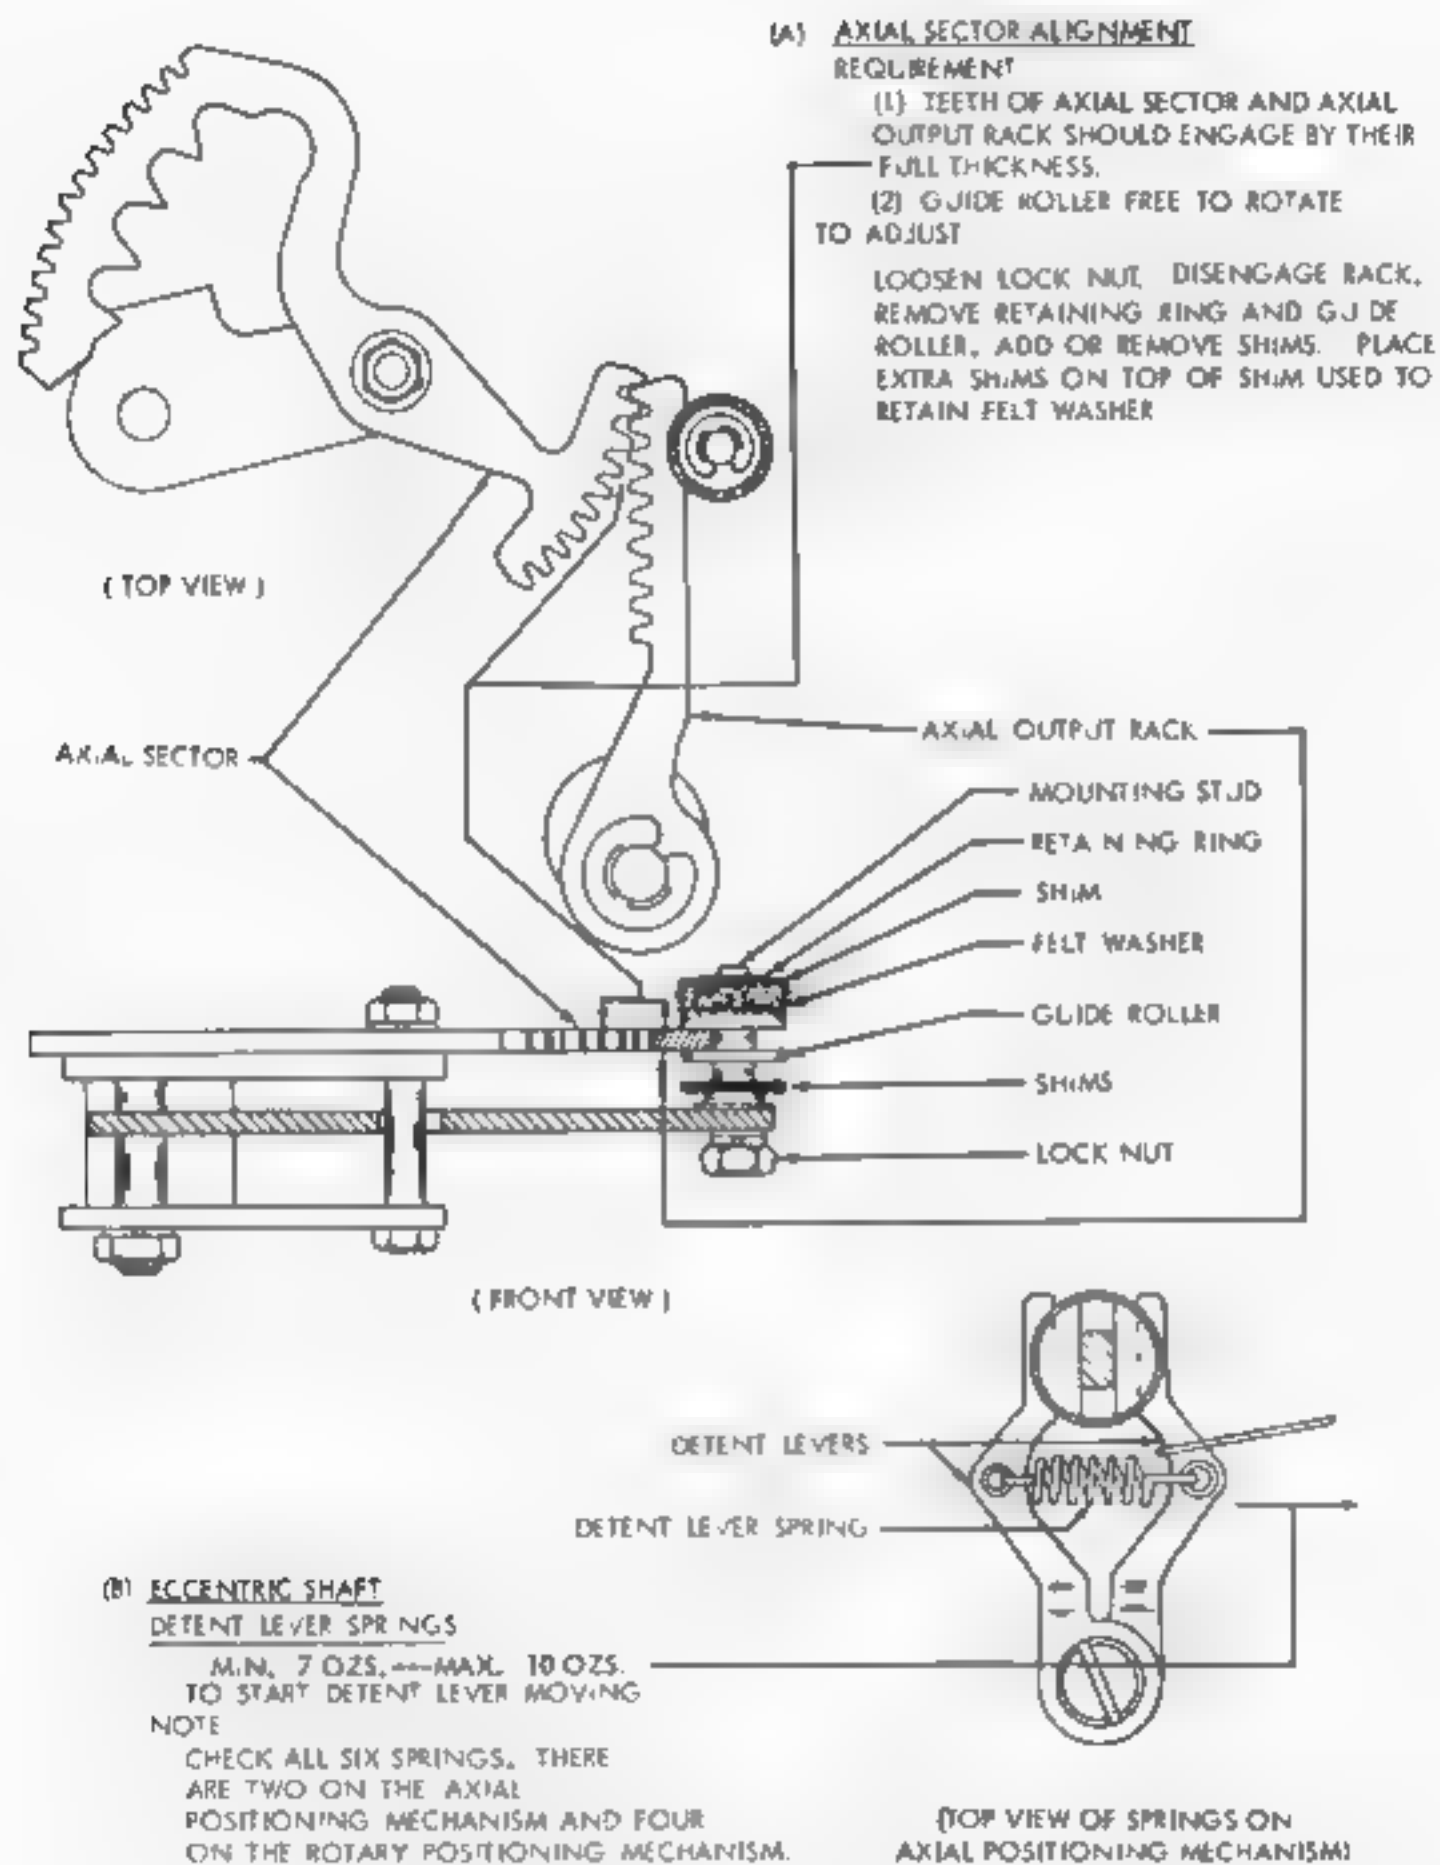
AXIAL POSITIONING MECHANISM
